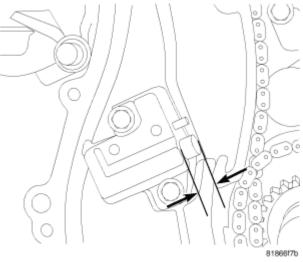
Checking Timing Chain Stretch Courtesy of CHRYSLER LLC
